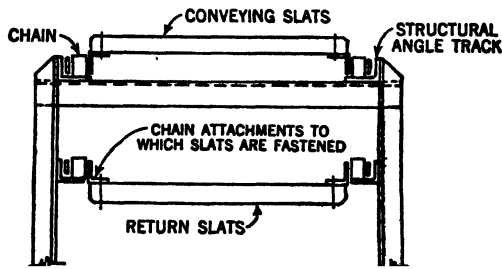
Section Through Slat Conveyor with Straight Rollers
